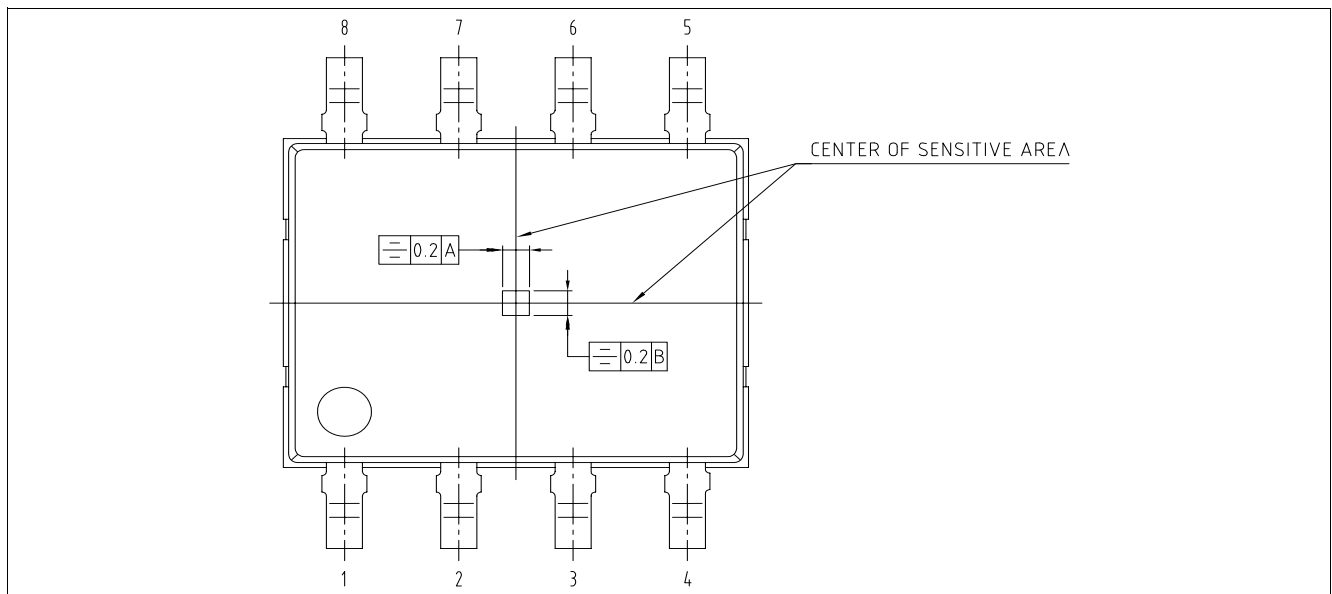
Pin Configuration of PG-TDSO-8 package
